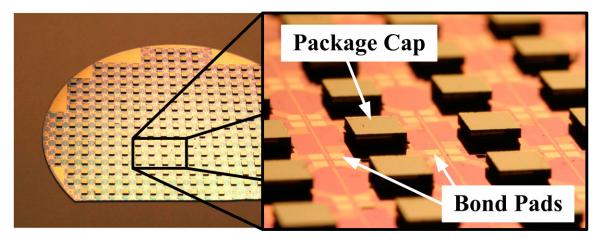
Picture of the completed Au-In TLP solder bonded wafer with a magnified view inset.
